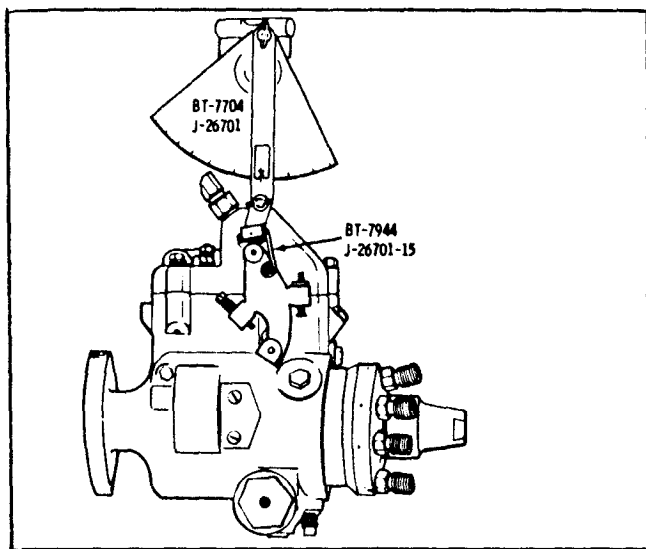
C5-9 Vacuum Regulator Valve Adjustment
